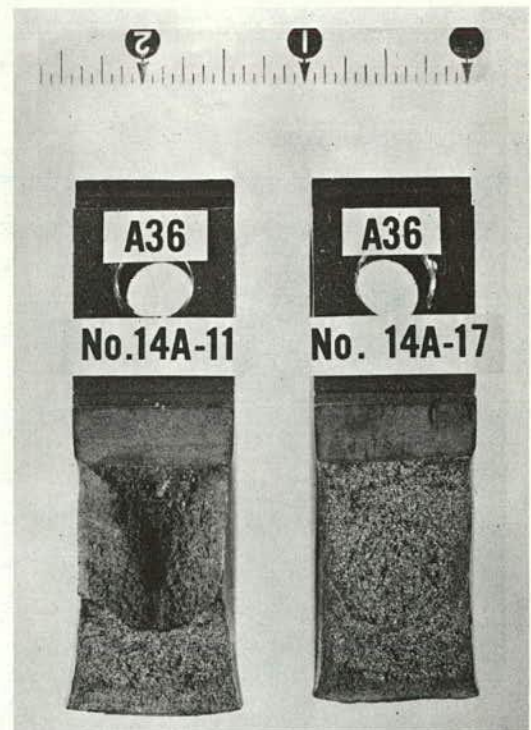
Fracture surfaces of two 1T WOL specimens of A36 steel tested to fracture under identical conditions but showing different fracture topographies (presence and total absence of shear-lip development).
